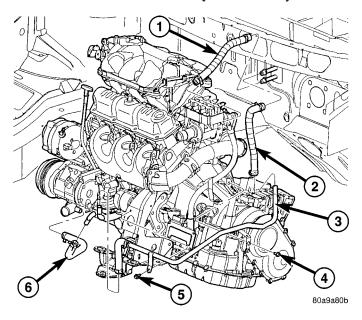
HEATER HOSES 3.3/3.8L (With Engine Oil Cooler)
